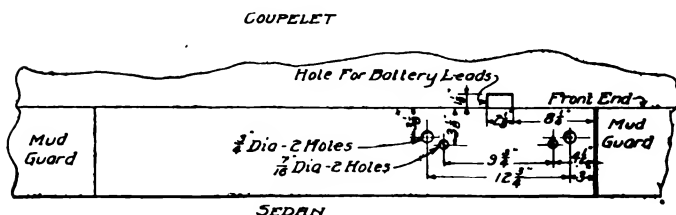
Layout of Right Running Board for Mounting Battery Box on All Ford Models
